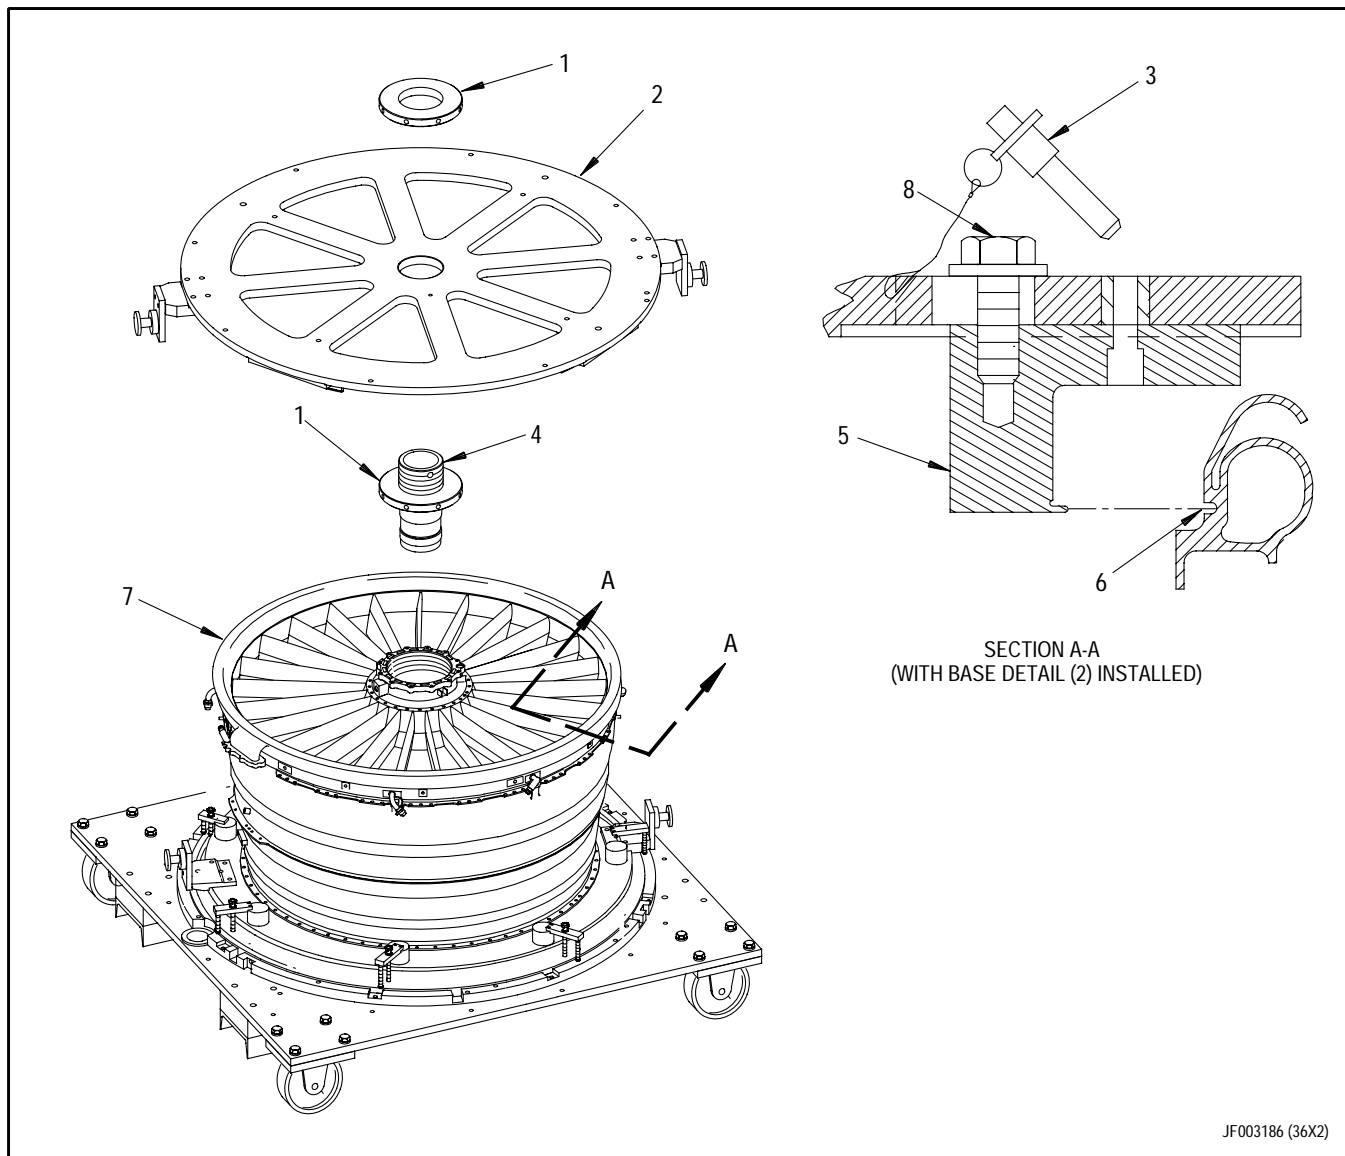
Rotating Inlet/Fan Module to Front End Up Position (Sheet 2 of 3)
